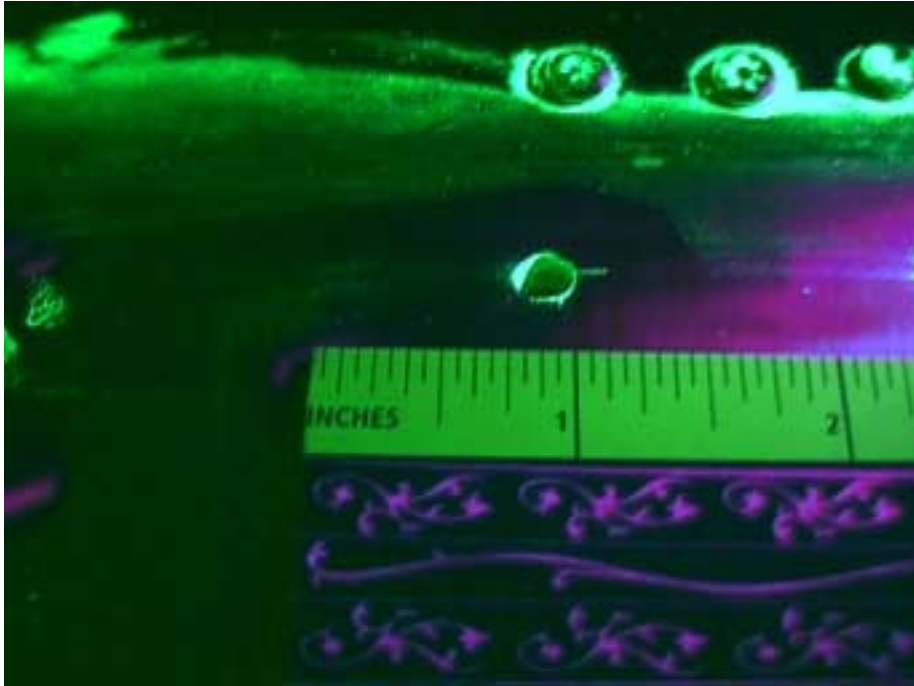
Crack-P2 under outboard aft external doubler panel. Crack is 100" in length.
